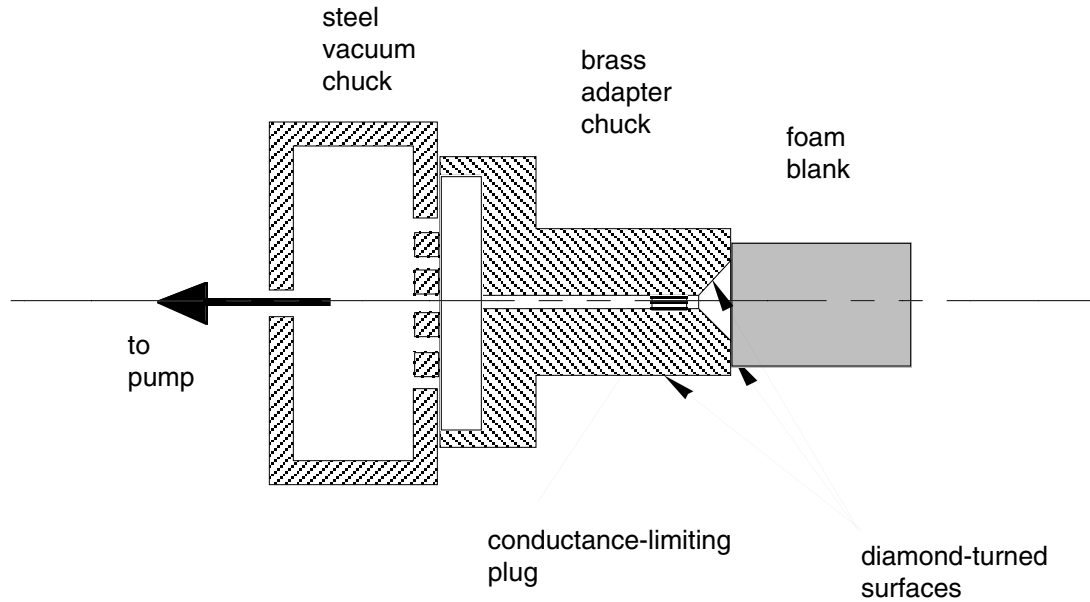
Schematic of vacuum adapter chuck for holding foam pellets during machining.
